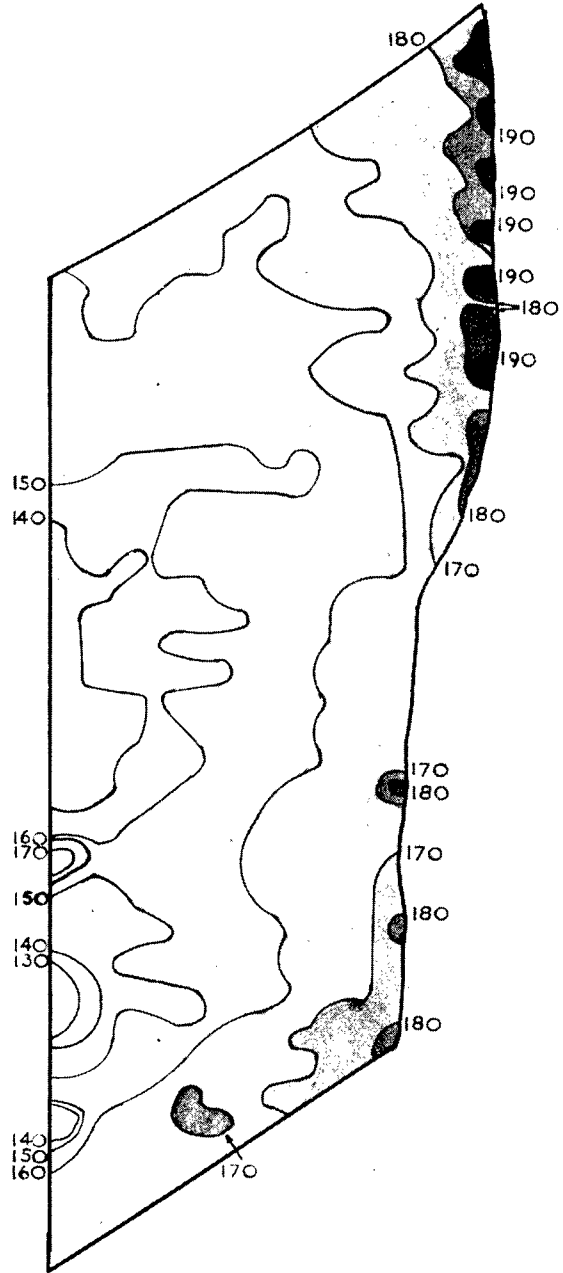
Hardness surveys of a cross-section embracing the tube hole
